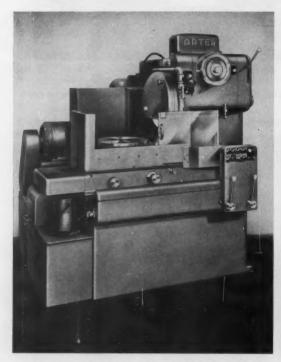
Arter rotary surface grinder with 16-inch chuck
